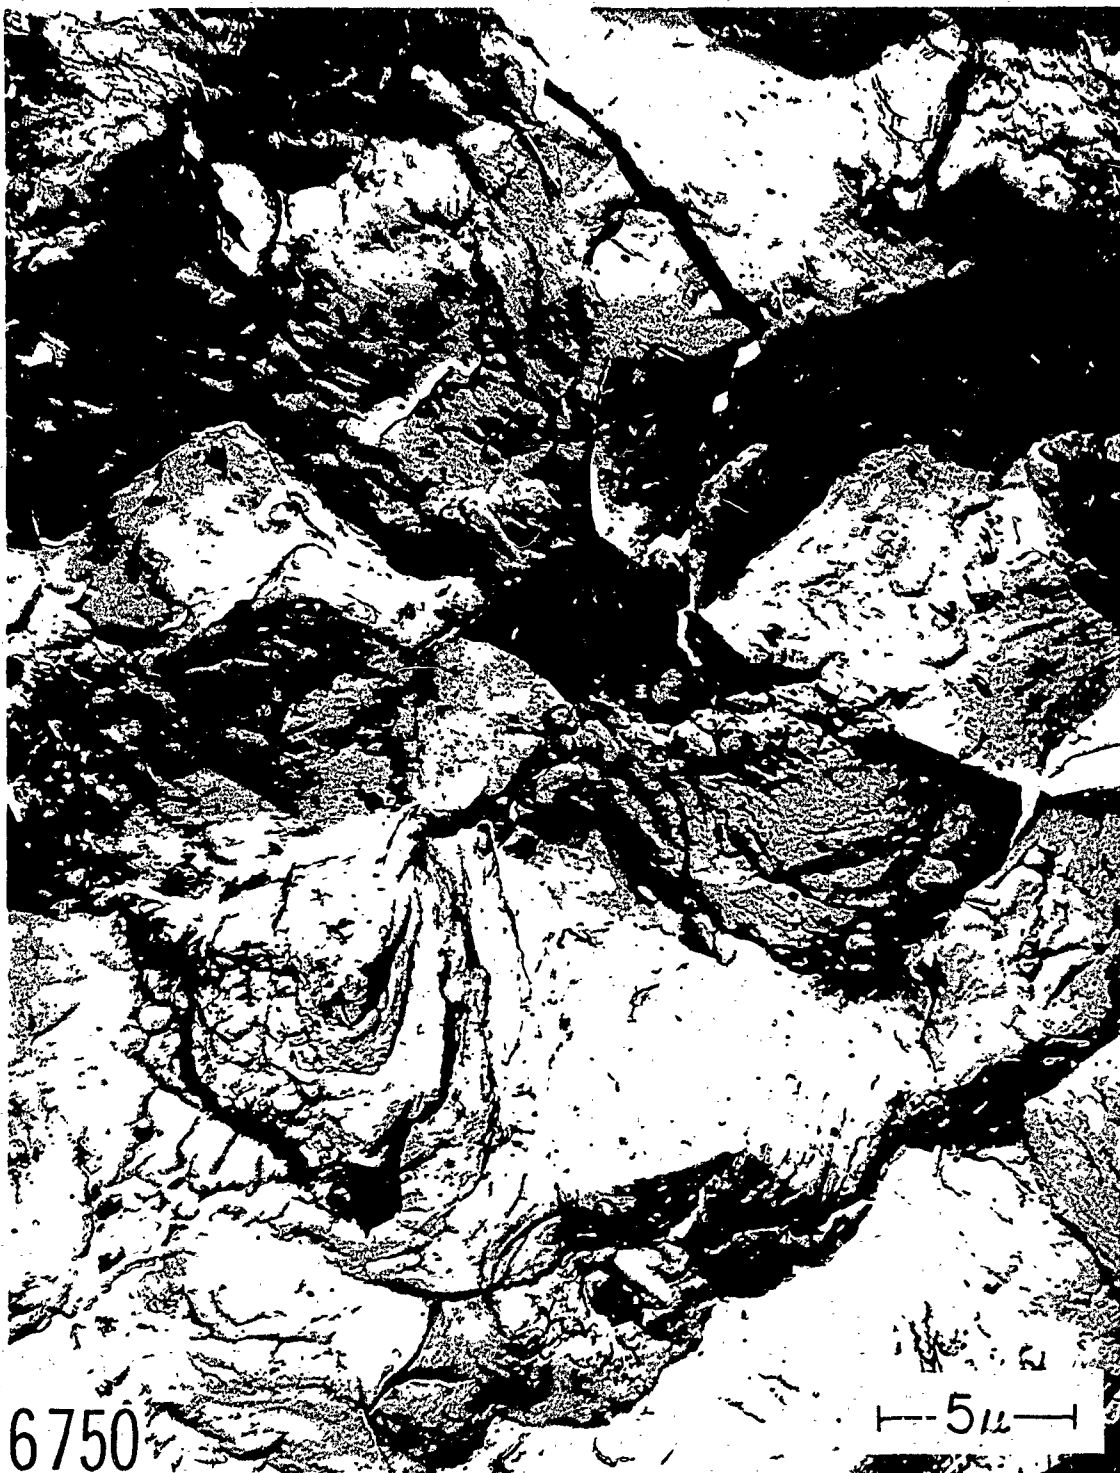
Mixed intergranular fracture and dimples typical of some plane-strain fracture surfaces in 4340 steel. View of fracture surface beneath the surface flaw. Other typical regions are shown in Figs. 8 and 9. Two-stage palladium-shadowed carbon replica. 6000X.
